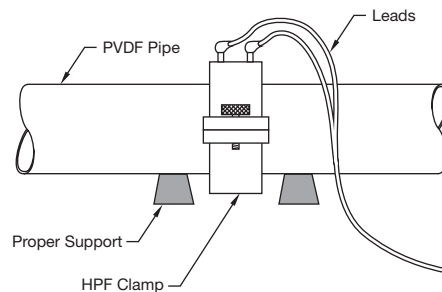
Portable HPF fusion makes welding in the rack reliable
